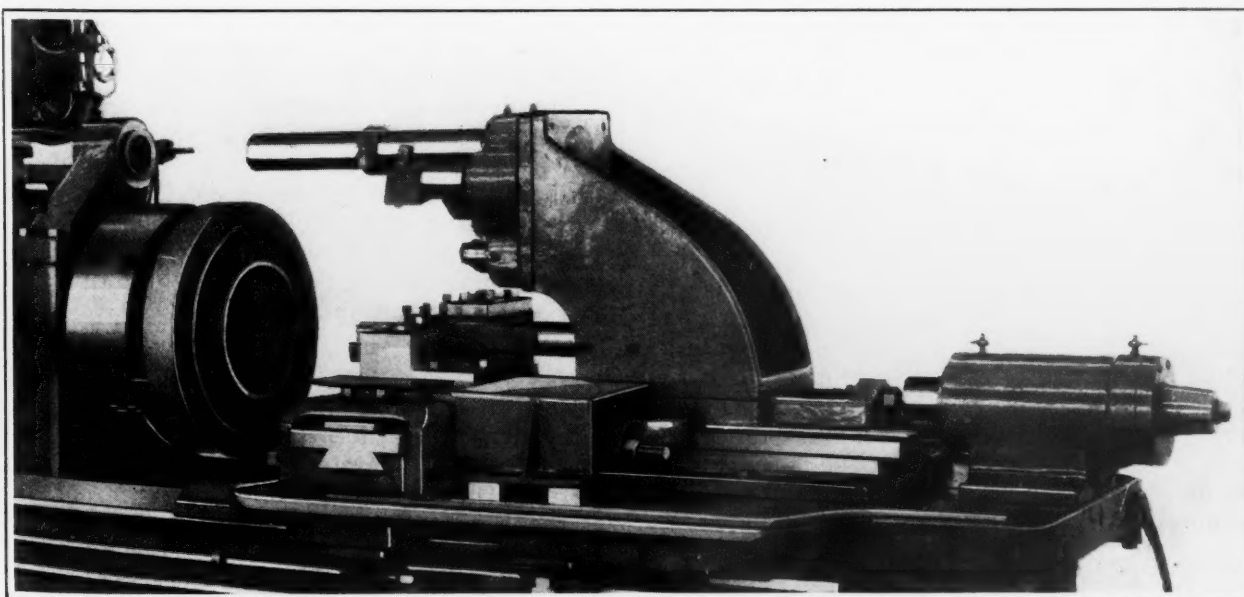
Tooling Arrangement for Machining the Flywheels Shown in Fig. 8
